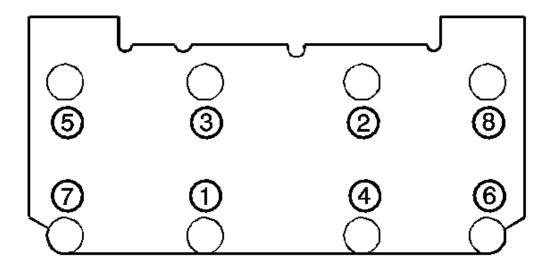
View Of Cylinder Head Bolt Tightening Sequence Courtesy of GENERAL MOTORS CORP.
